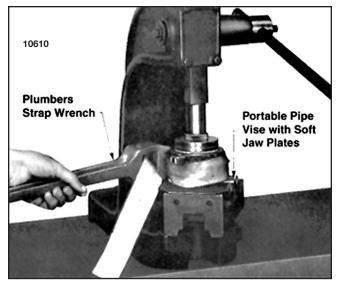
Winding Load Brake Gear Using a Strap Wrench to Set Up Load Brake Spring
